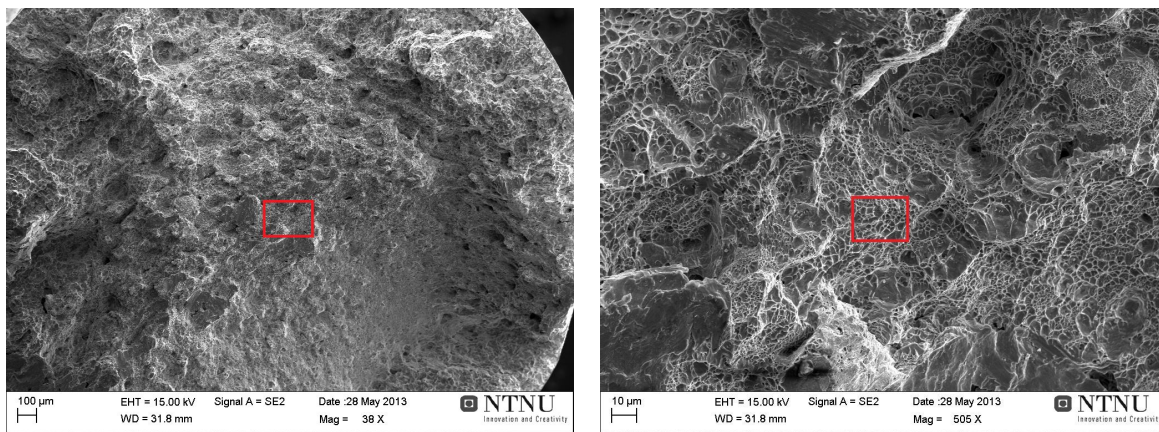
The image shows the fracture surface along the edge of a smooth HIP sample after the HISC testing.
